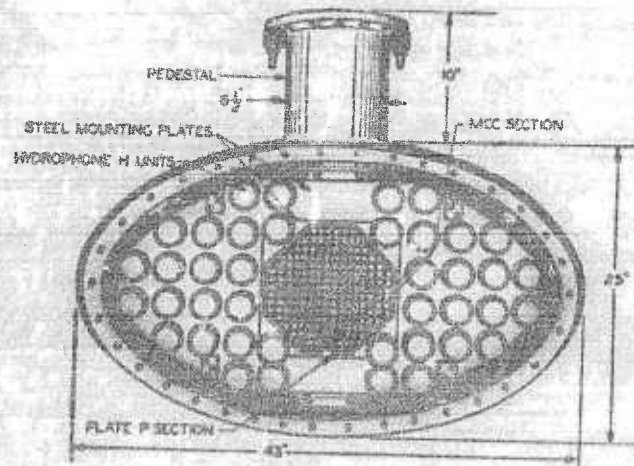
Football-type WFA-1 topside transducer with rubber cover removed.
